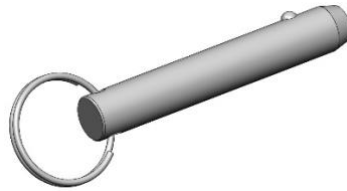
The McMaster Carr Ring-Grip Quick-Release Pin used to fasten sprue bar assemblies to the rack. [12]
